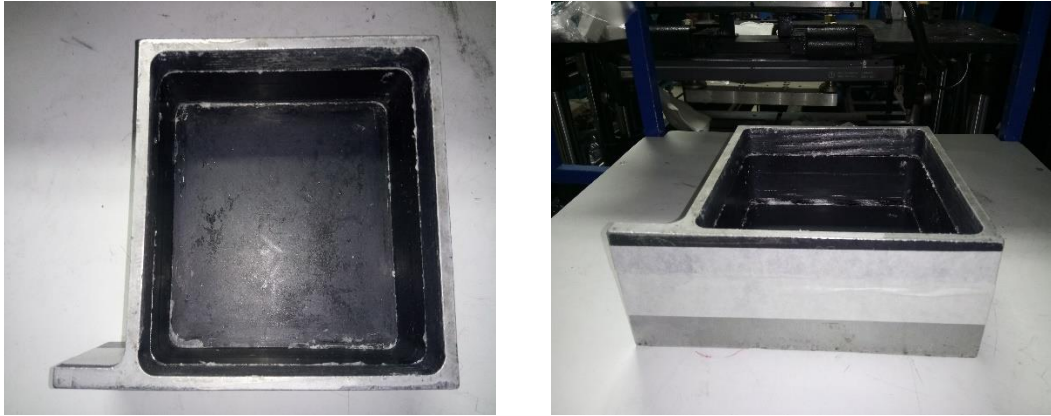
Standard box mold with dimensions (17 cm × 17cm × 5cm)
